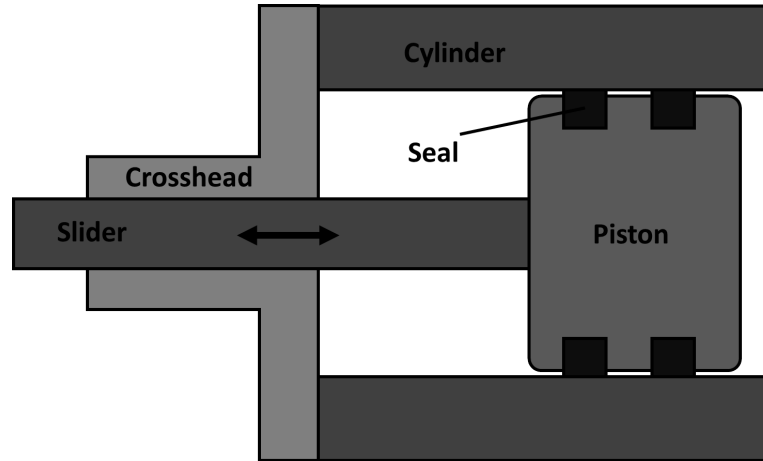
SCHEMATIC OF GENERIC PUMPING HEAD DEPICTING PRIMARY COMPONENTS
